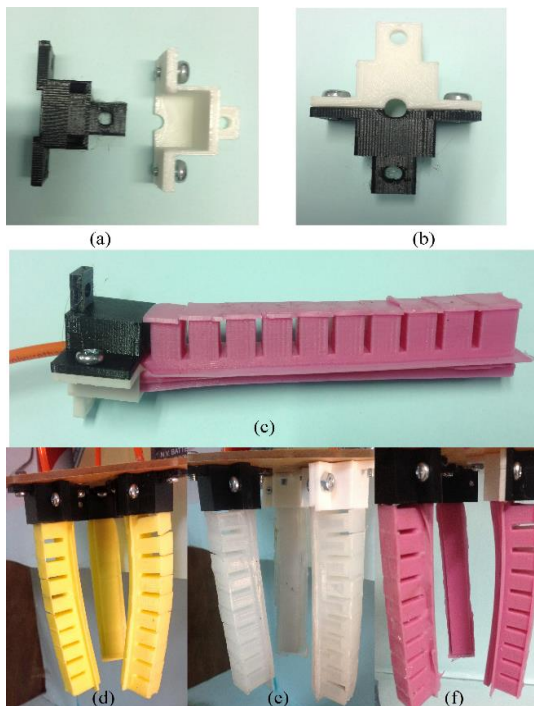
Gripper assembly process: (a) 3D printed connector in two parts, (b) Upper and lower parts are screwed together, (c) Pneumatic actuator inserted in connector, (d, e, f) Three actuators are connected to base with screws.
